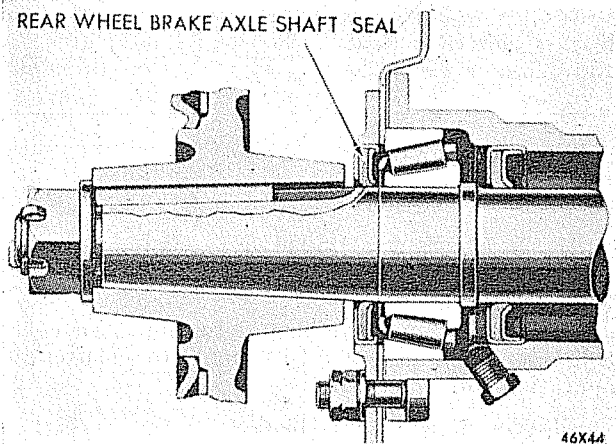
Rear Wheel Bearing Outer Oil Seal.
